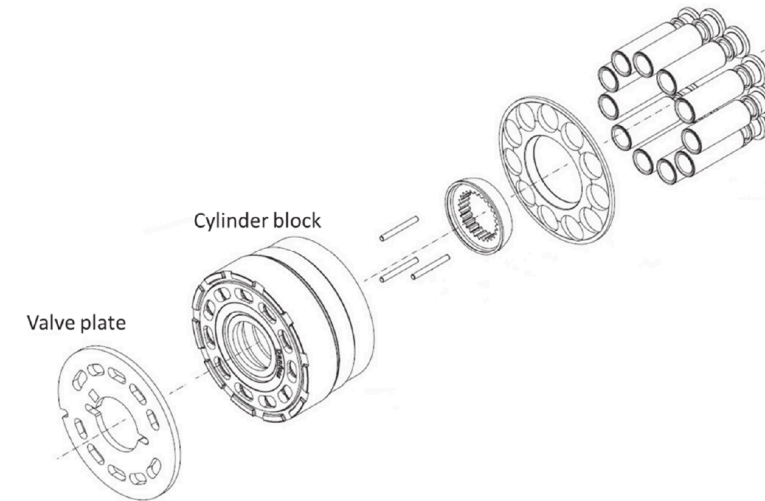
Exploded view of the rotational kit of a swashplate type axial piston pump
